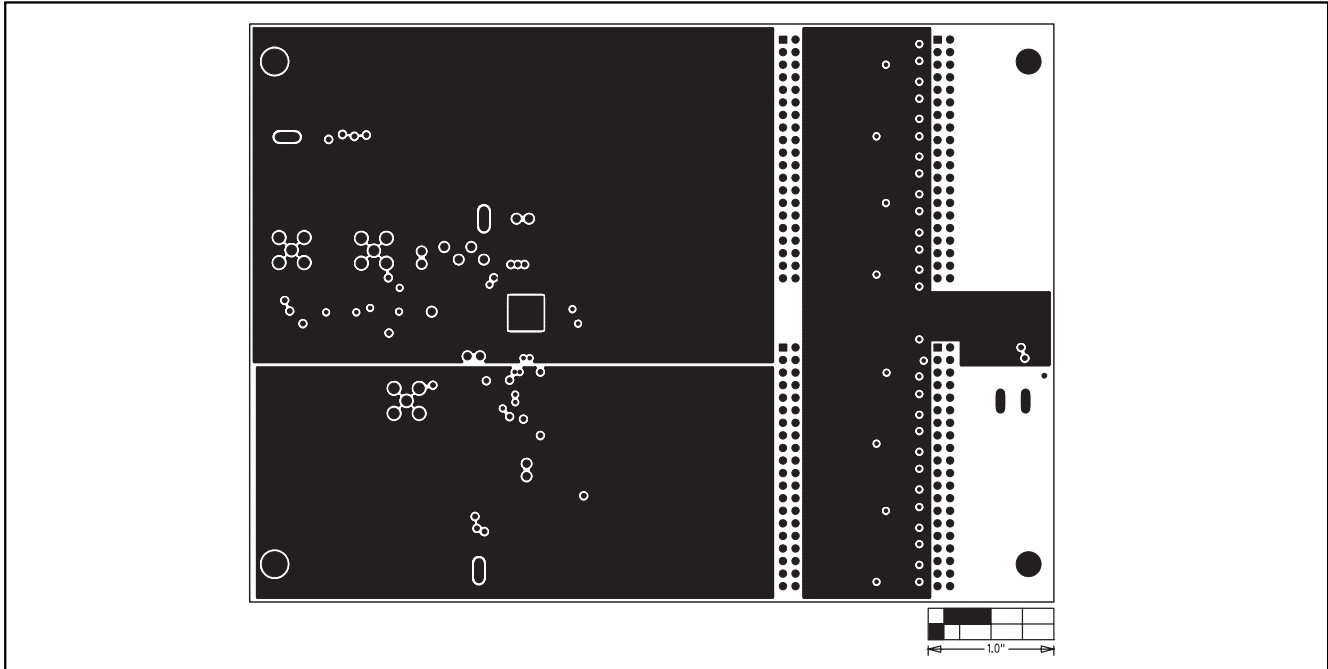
PC Board Layout (Inner Layer 3)—Power Planes
